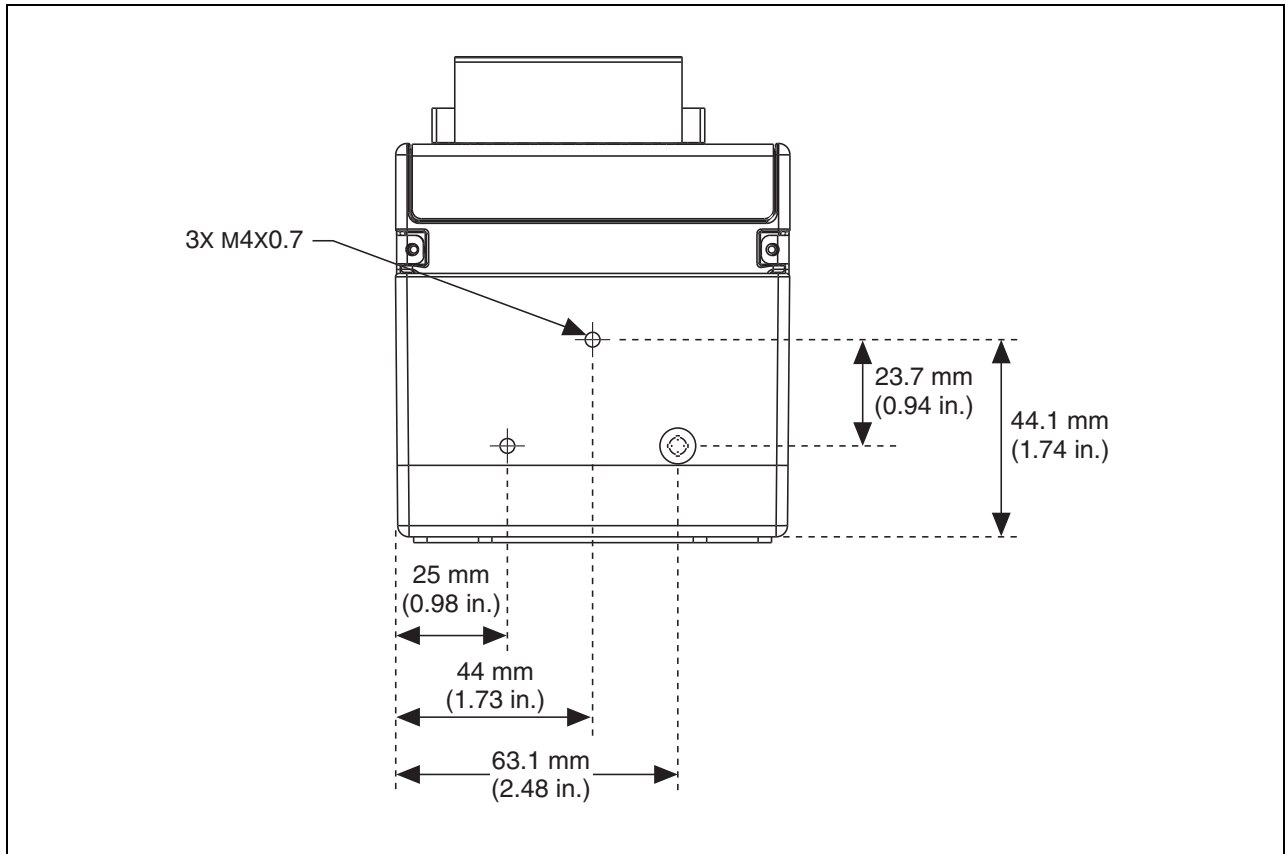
cRIO-9072/3/4, Side View with Dimensions
